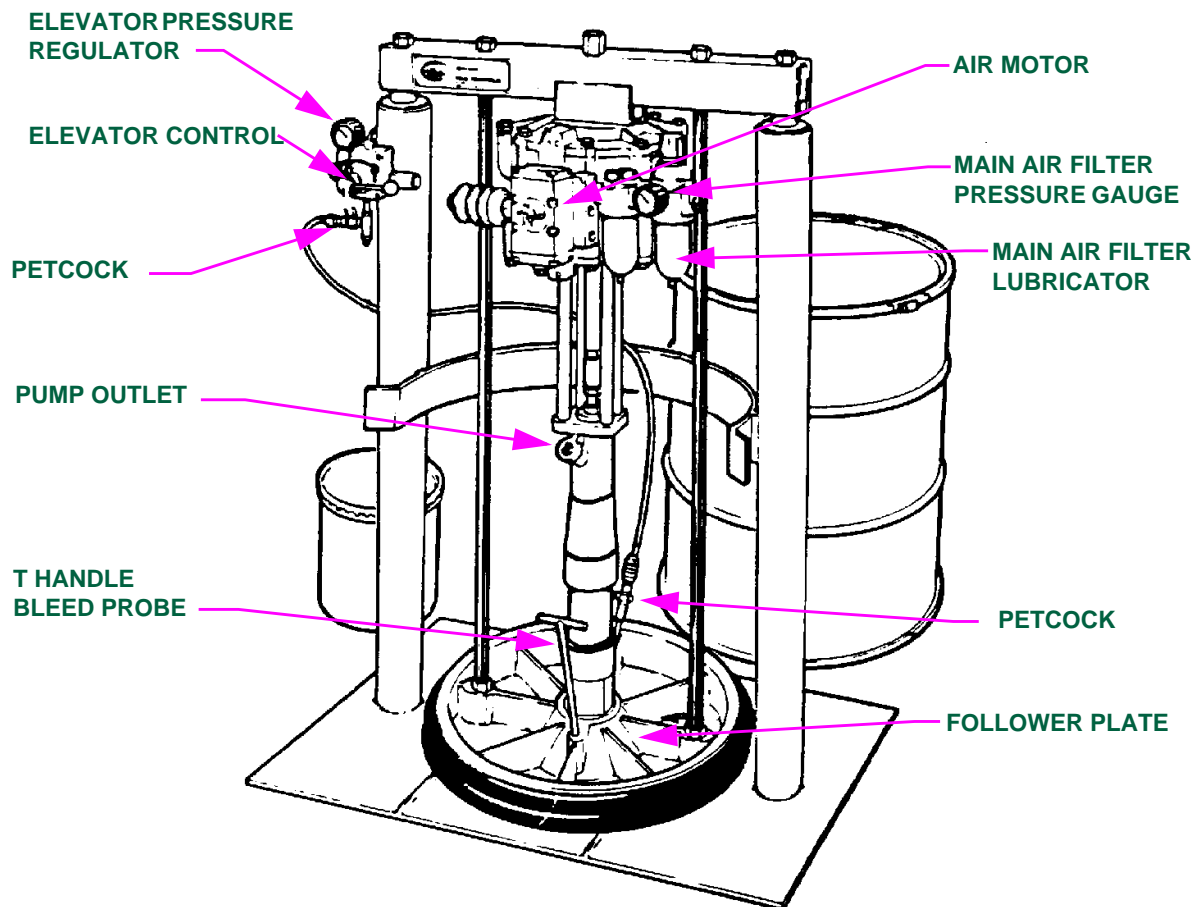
BASE PUMP AND ELEVATOR ASSEMBLY
